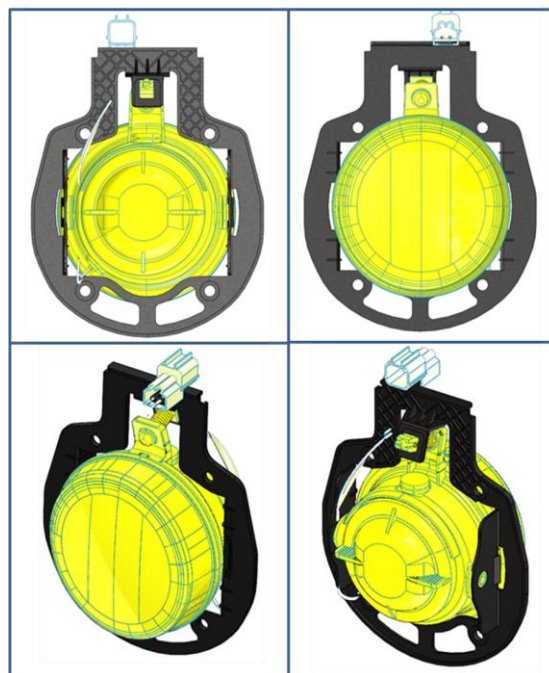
Proposed PP-GF30 bracket assembled with light module.
